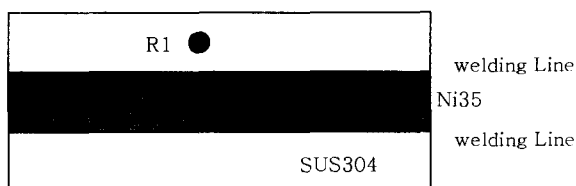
The shape of specimen and measuring position of residual stress by hole drilling method
